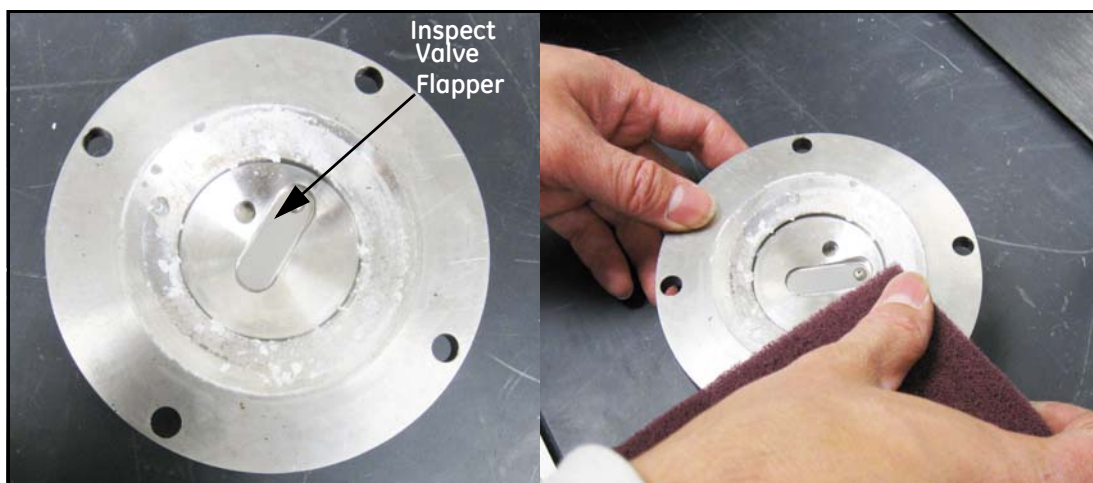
Cleaning Pump Head Surface That is in Contact with Diaphragm
